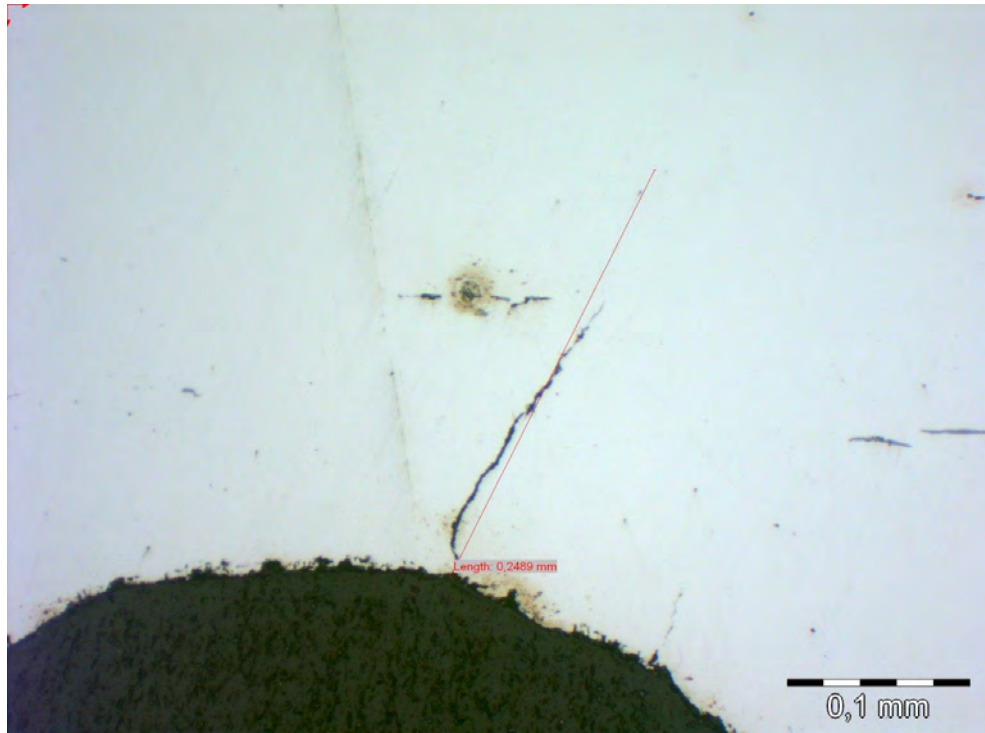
Cut two in crack at segment B, second ridge on barrel no. SFK 0120-A
